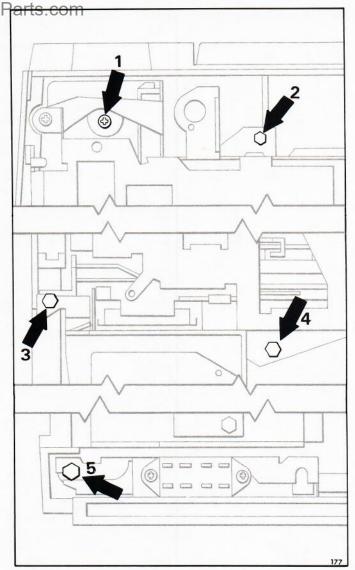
MECHANISM AND LAMPHOUSE ASSEMBLIES
